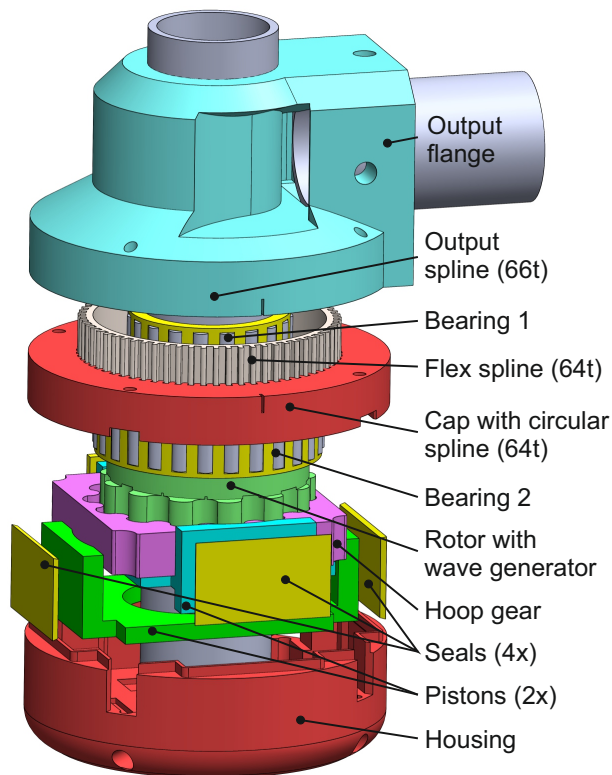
Exploded view of geared pneumatic stepper motor. The housing has two cylinders with pistons acting on a hoop gear, which in turn drives a cycloid gear to which the wave generator of the strain wave gear reduction is attached.
